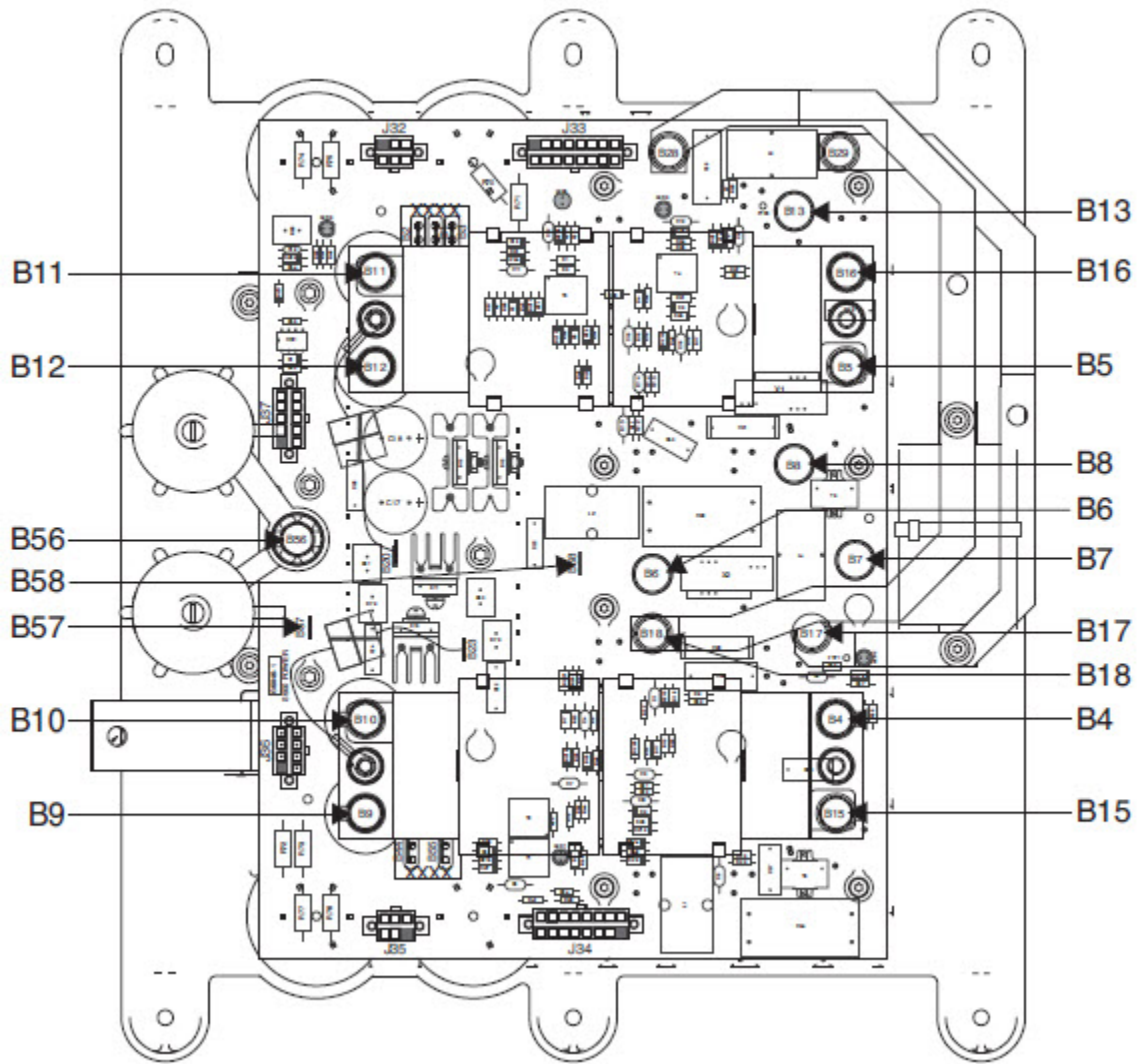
Power Conversion Assembly Voltage Check Test Points
